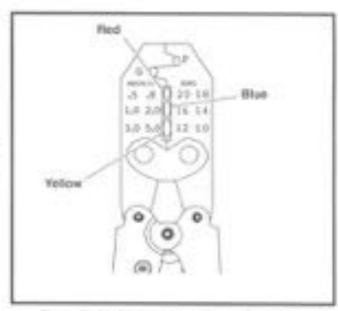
Packard Crimp Tool (HD-38125-8)
